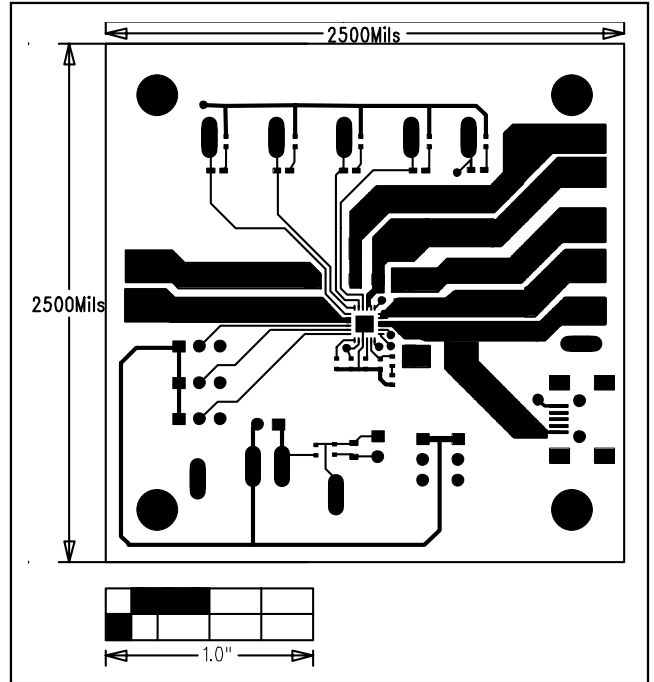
MAX8677A EV Kit PCB Layout—Component Side
